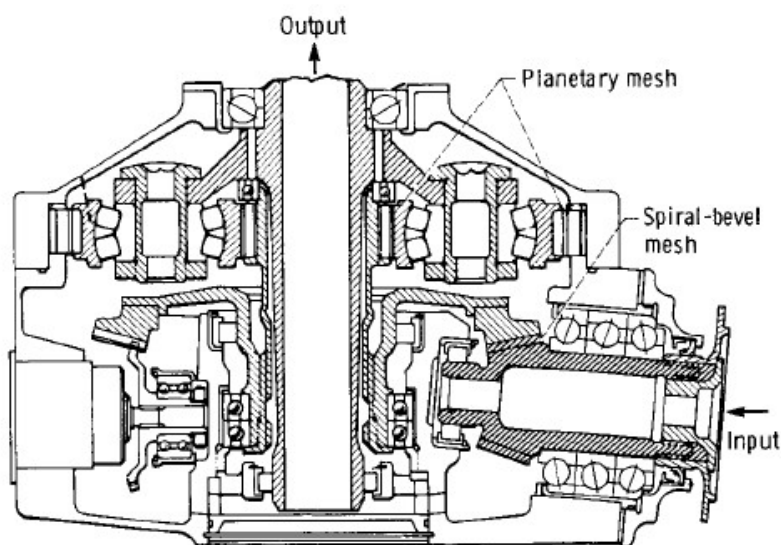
Bell 206B-1 (OH-58) main rotor gearbox (three-planet version) [1].
